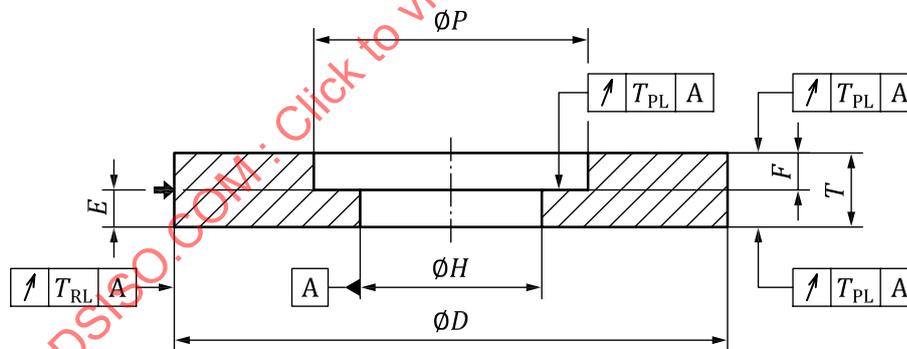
Grinding wheel, recessed on one side (Type 5)
